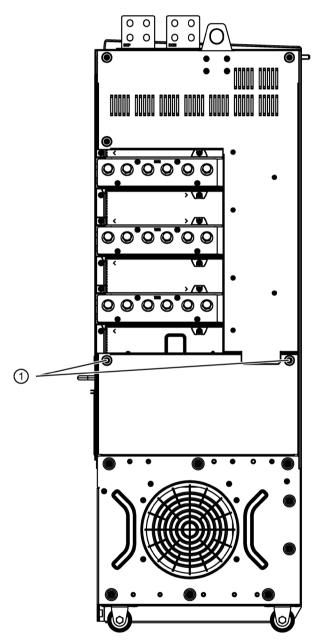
Replacing Control Interface Module, Active Line Module and Motor Module Chassis-2, frame size FS2, FS2+, FS4, FS4+ Part 1
